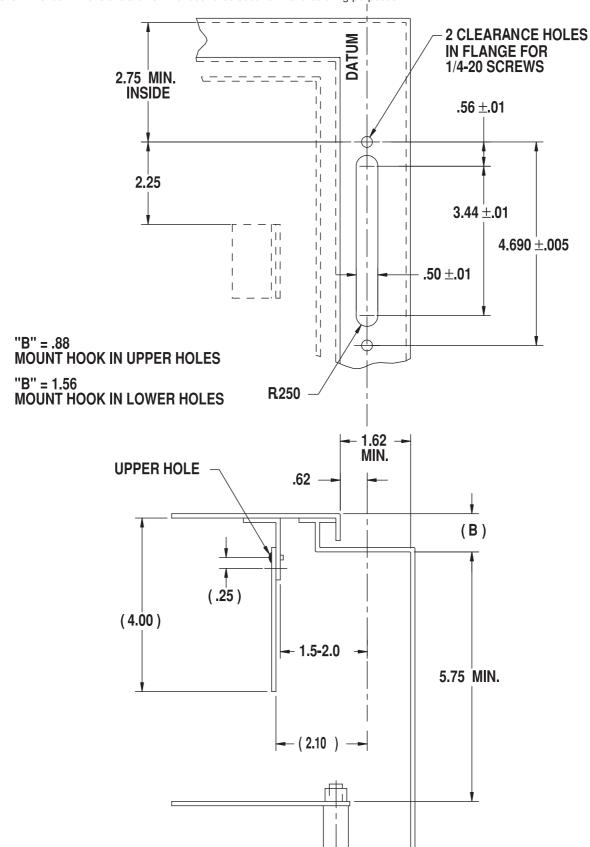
Flange Drilling Plan for Handle and Interlock Blade Mounting Dimensions
